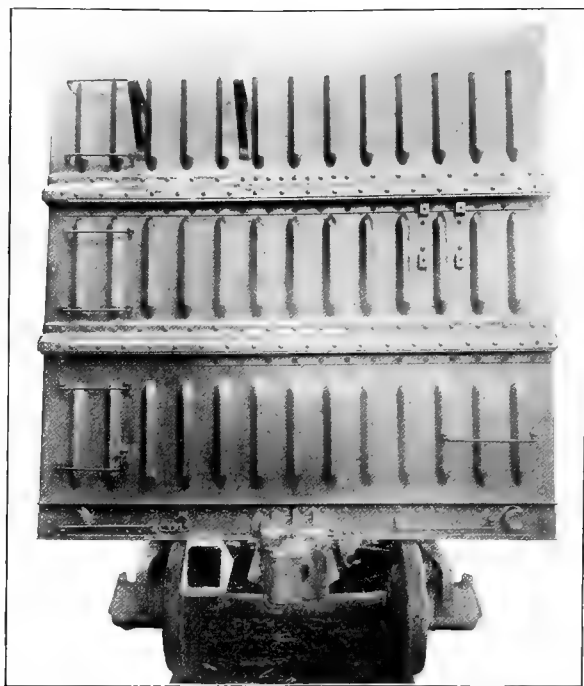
American Car & Foundry Company Three-Piece Steel End
